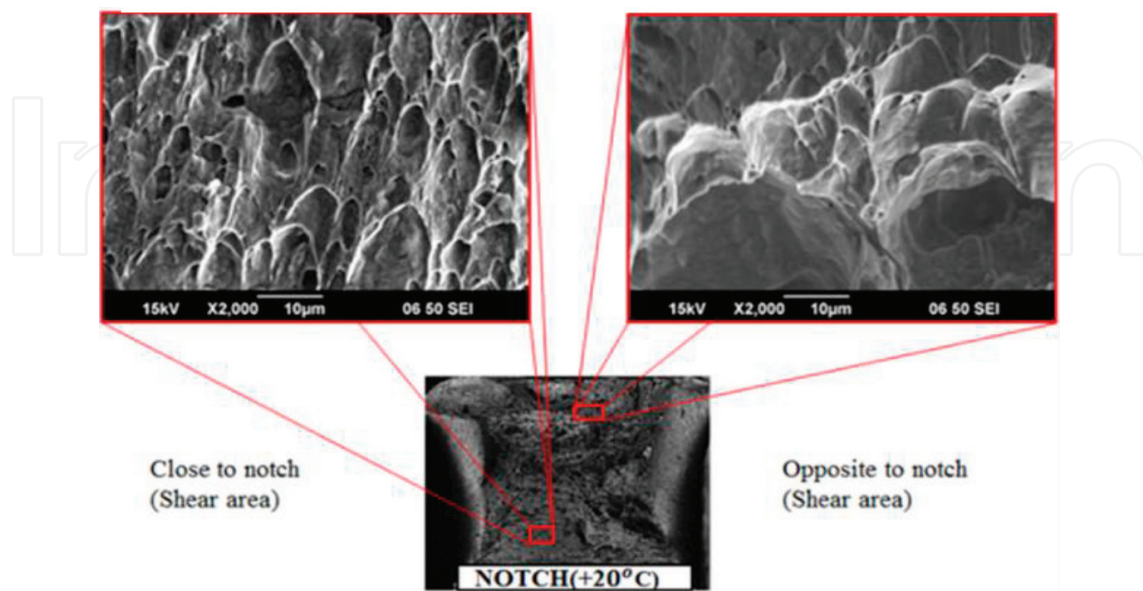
Fracture surface for 10-mm thick CVN specimen tested at +20°C.
